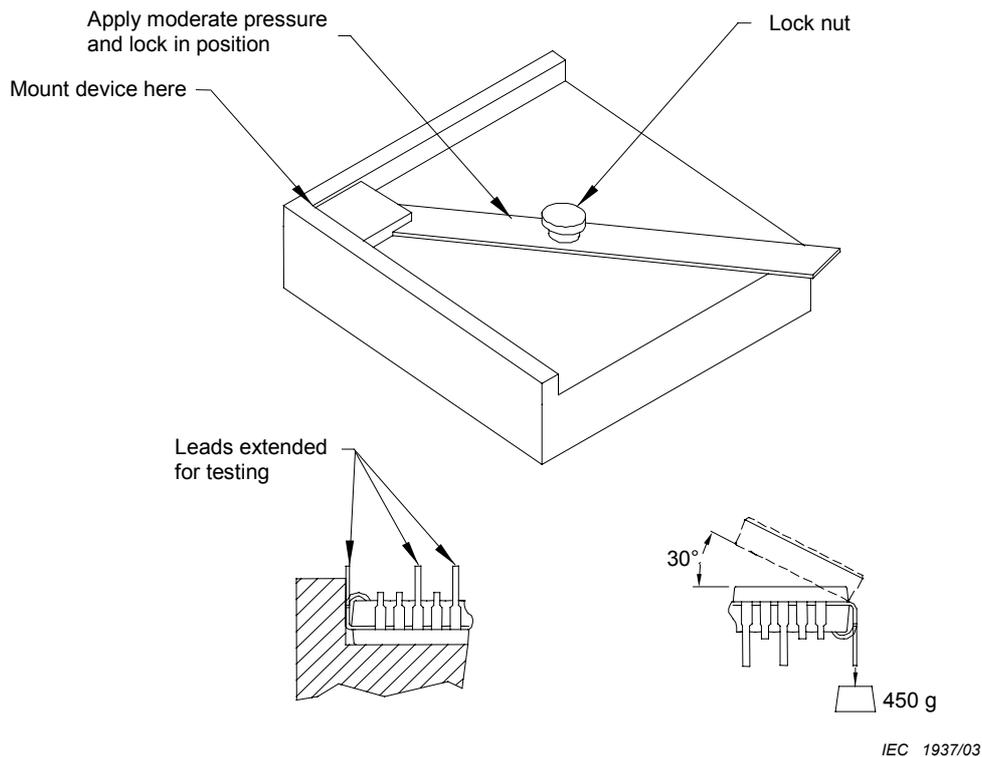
Holding fixture for straightening and lead bend for “J” lead configurations
